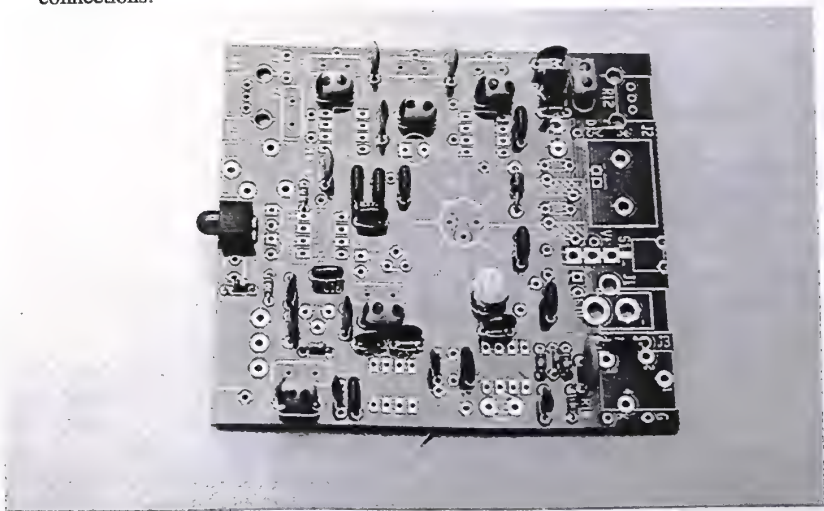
Approximately "three hours into assembly," the SST kit begins taking shape, LED on left will be signal monitor on front panel. Volume and tuning pots will be mounted on each side of LED.
